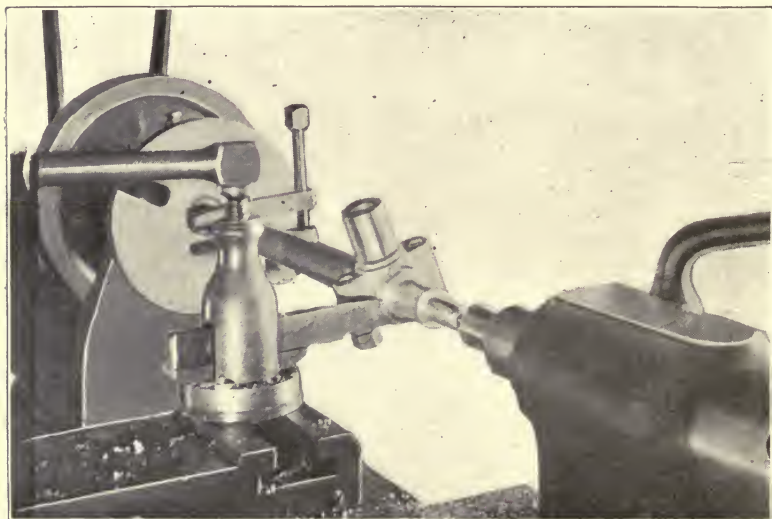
TURNING AND FINISHING CONNECTING ROD HEAD.
